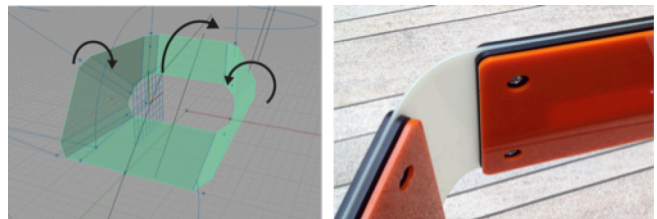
CAD parametric model for kinematic analysis (left); assembly detail of final Nylon/Delrin prototype (right).
